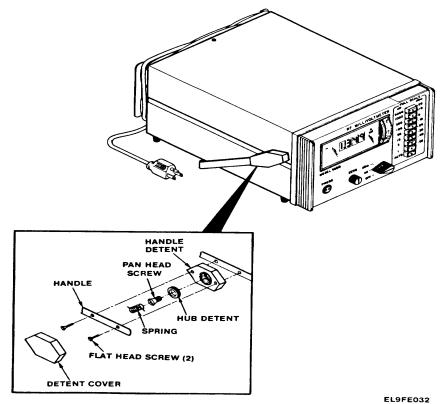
Removal of Handle Assemblies, ME-526A/USM.
